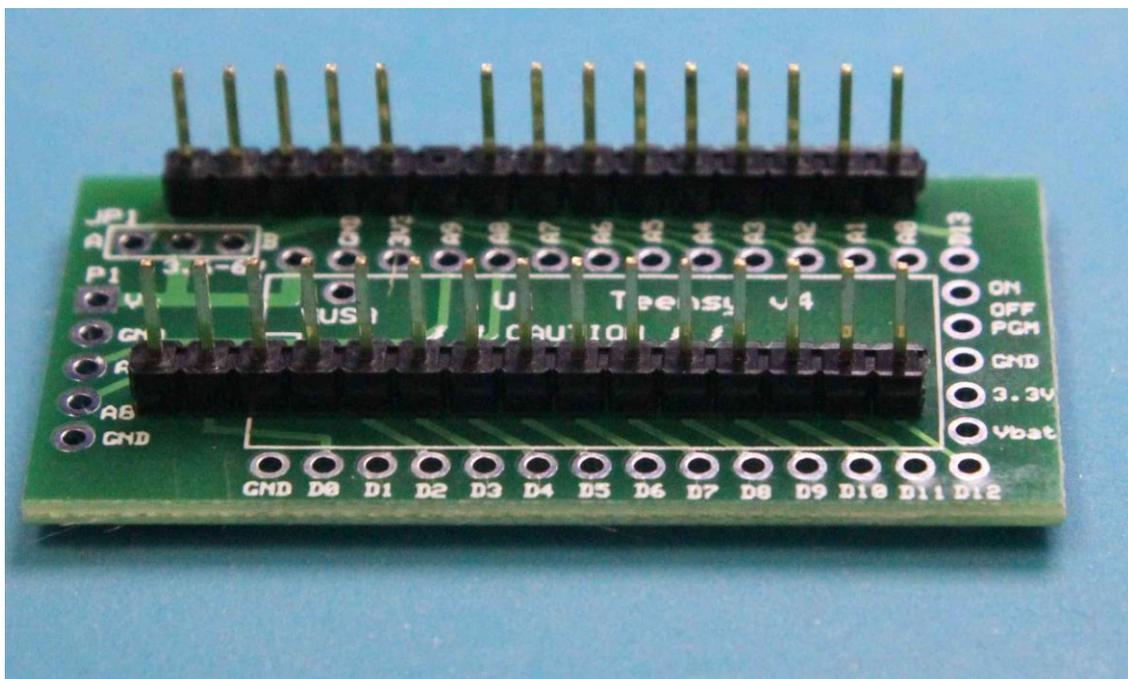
Male pins properly soldered in place. The removed A6 pin MUST be the sixth pin from the left with the board oriented as in the above picture.
